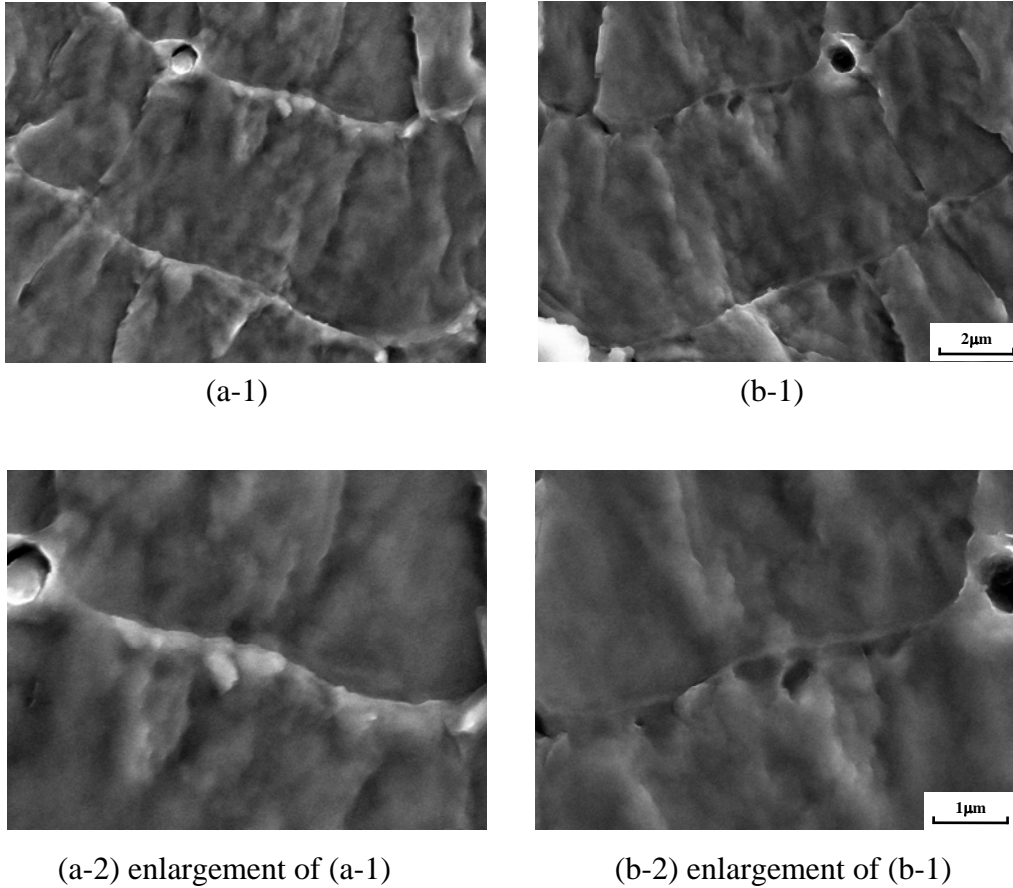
Brittle striation formation on the mating fracture surfaces
